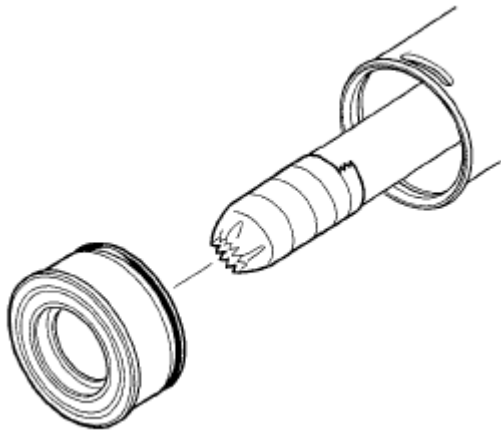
Identifying Rack Bushing Onto Steering Rack
